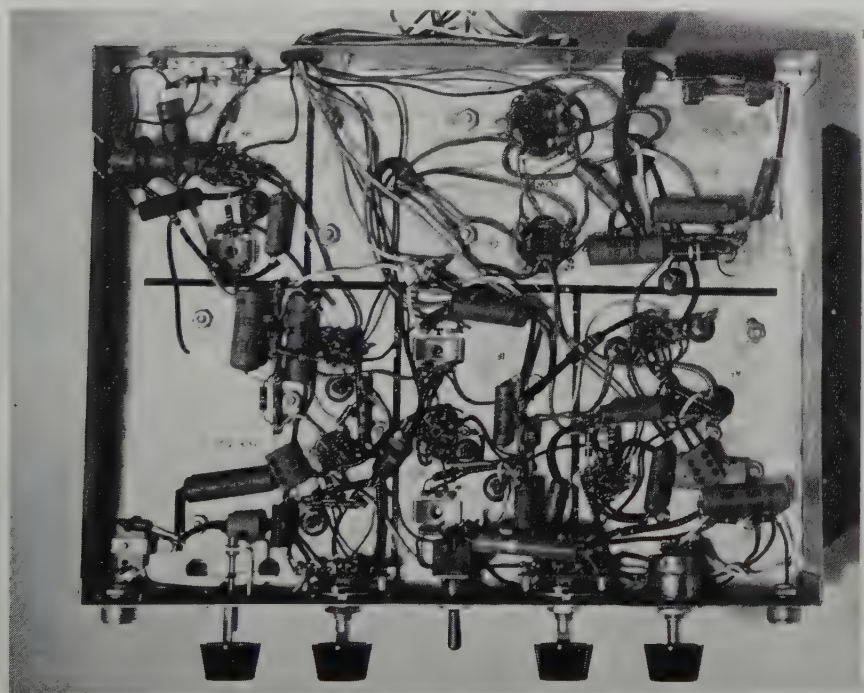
(b). Bottom view of receiver packaged using the standard method.
